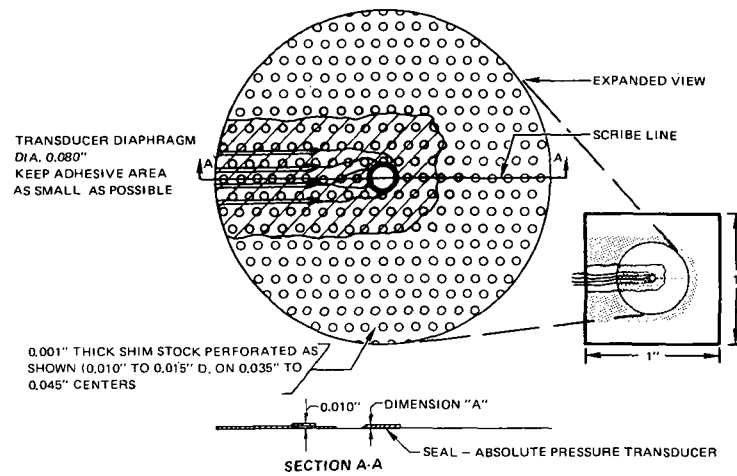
Thin Surface Mount Transducer, P&WA Requirements
